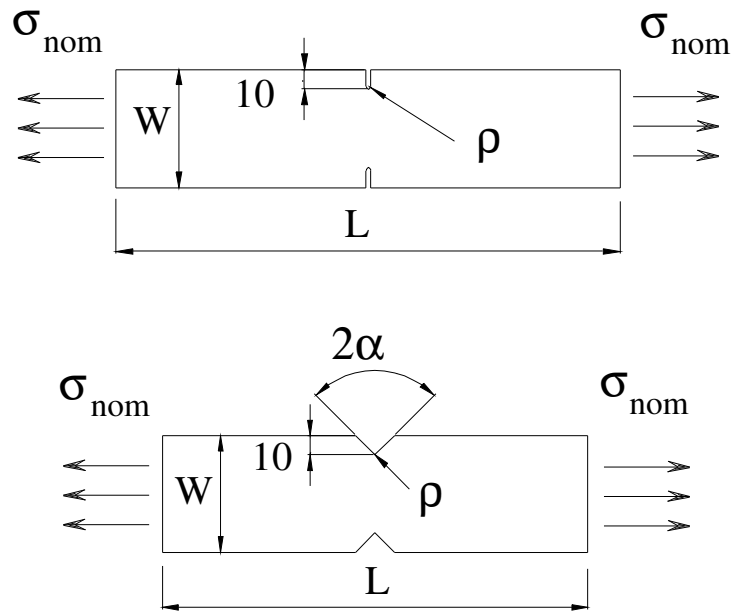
Geometry of specimens made of FeP04 deep drawing steel [22] ($W=60$ mm, $L= 220$ mm, thickness 2 mm)
